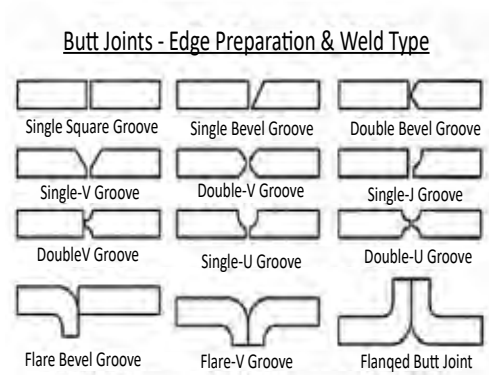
Butt Joints- Edge preparation and Weld Type
